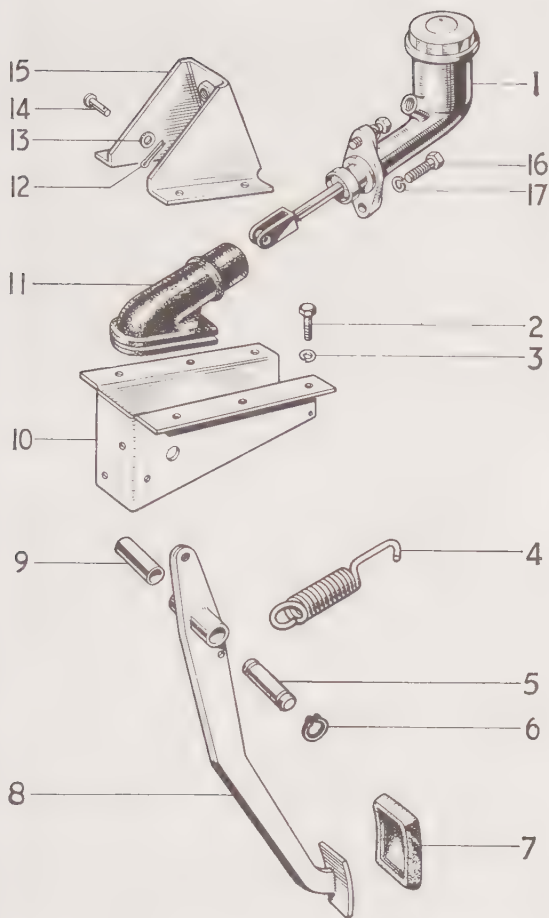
2 Arrangement of brake master cylinder, pedal and chassis brackets.
